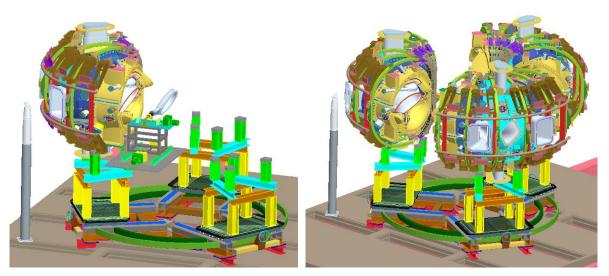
Schematics illustrating base structure, retractable FPA carts, and machine assembly.
